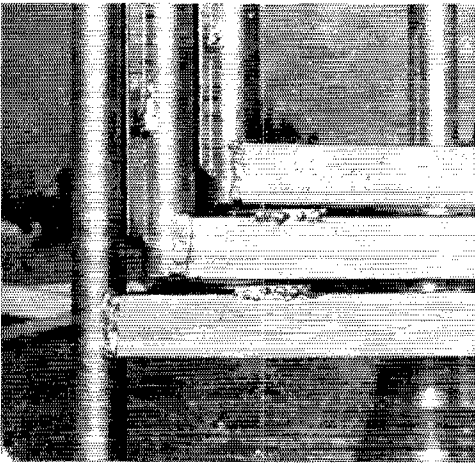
Detail view showing the welding of the crossbraces to the legs. This view also shows the steel-angle slides of the top and middle sections. The welds visible between the tower sections are at the ends of diagonals (same material as the crossbraces) which serve as rests for the two top sections when the tower is completely telescoped.
